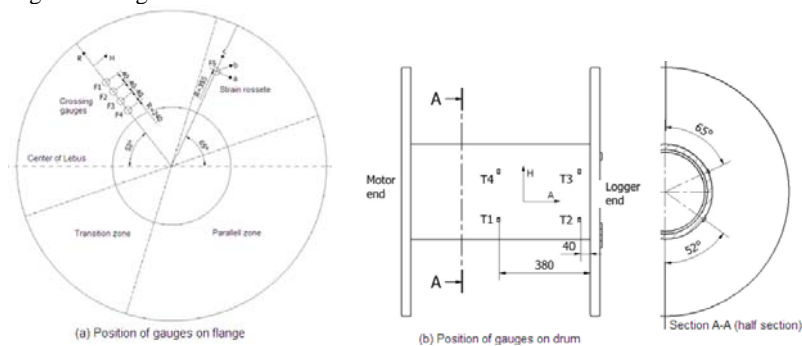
Positioning strain gauges on flange (F1 – F5) and on drum (T1 – T4)
